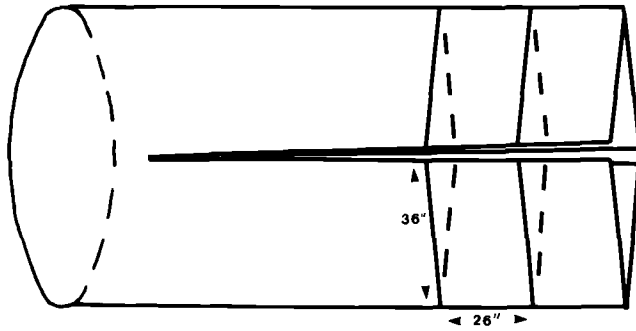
In one method garbage bags are made from a sectional film tube. 1 in. = 25.4 mm.
